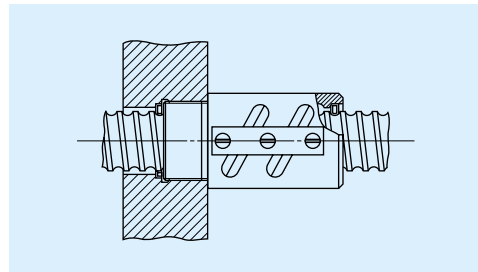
Installation of brush-seal to a ball nut with thread screw
